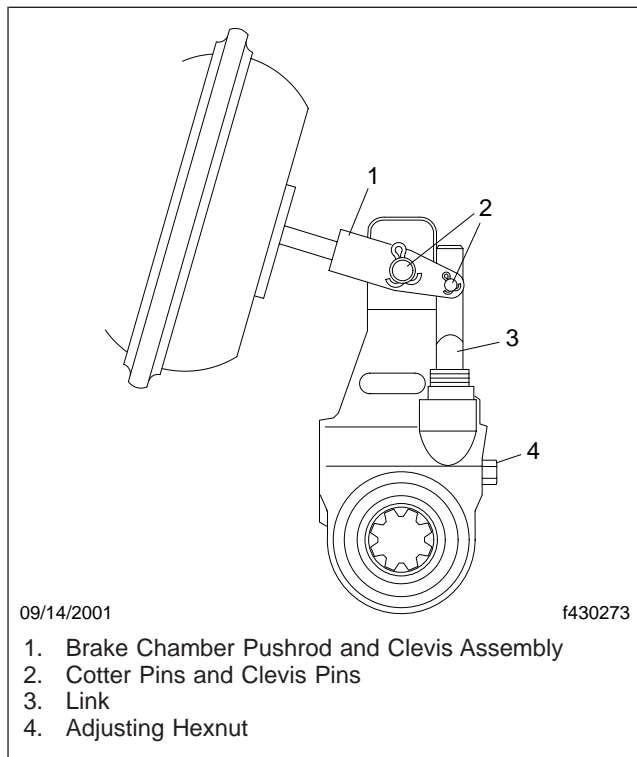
, Slack Adjuster (attached to welded clevis)
